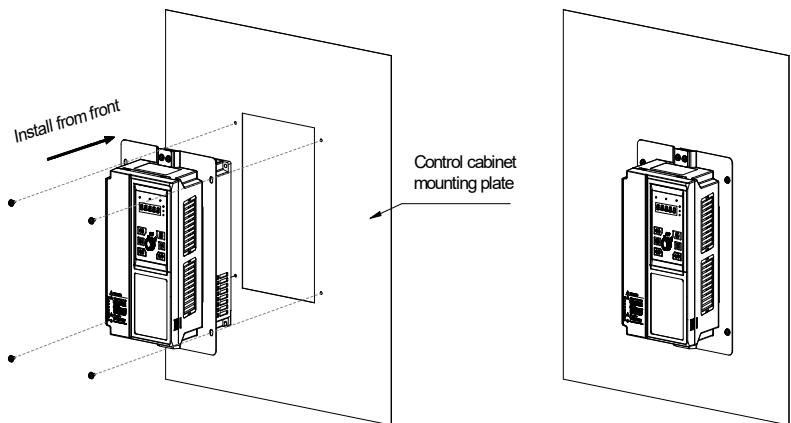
Embedded Installation Diagram of Plastic Structure
